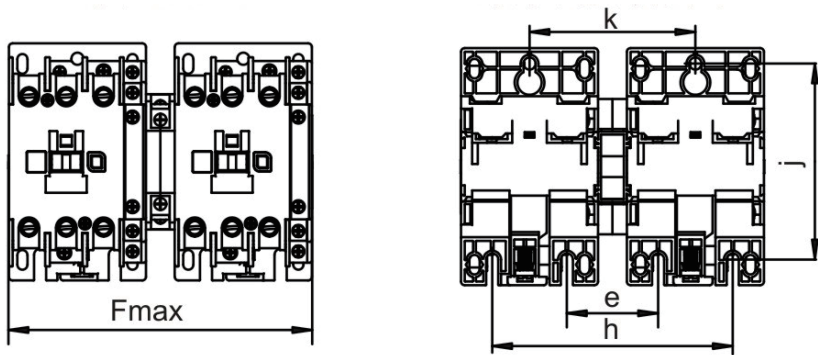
TGC1s-40N~95N outline and installation dimensions drawings
